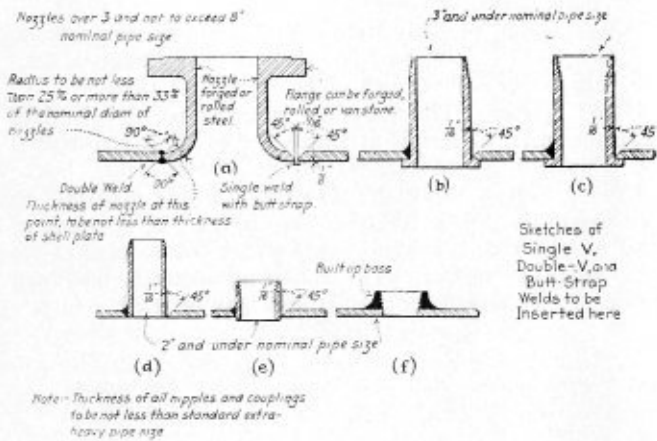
Methods of Autogenously Welding Nozzles
